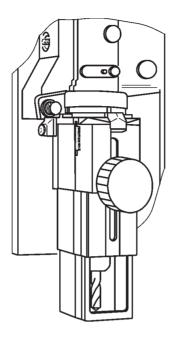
Example of an adjustable guard for a radial or pedestal drilling machine
